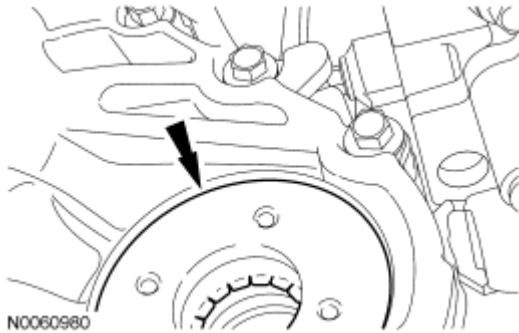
Identifying Intermediate Shaft Seal & Special Tools (204-038, 205-153)
